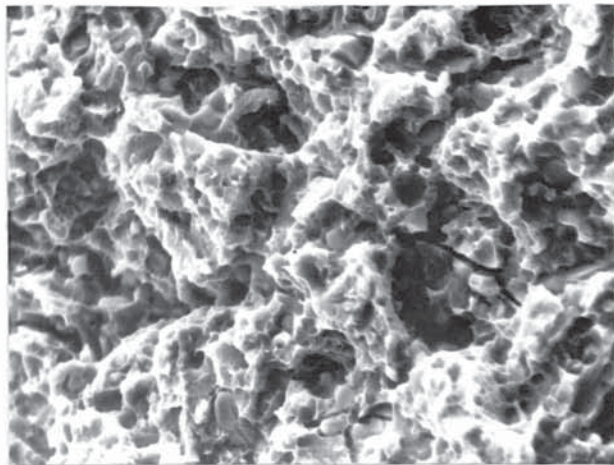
(a) 400°Cx16hours - M2 Fatigue Fracture Surface
